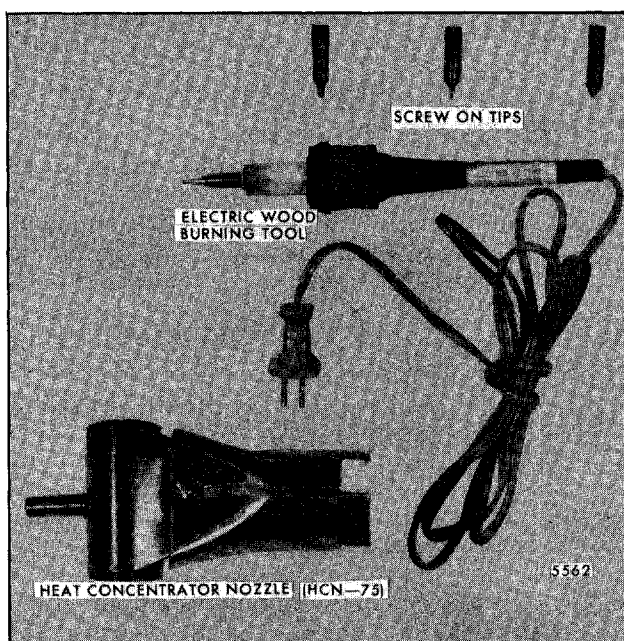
Wood Burning Tool and Heat Concentrator Tool
